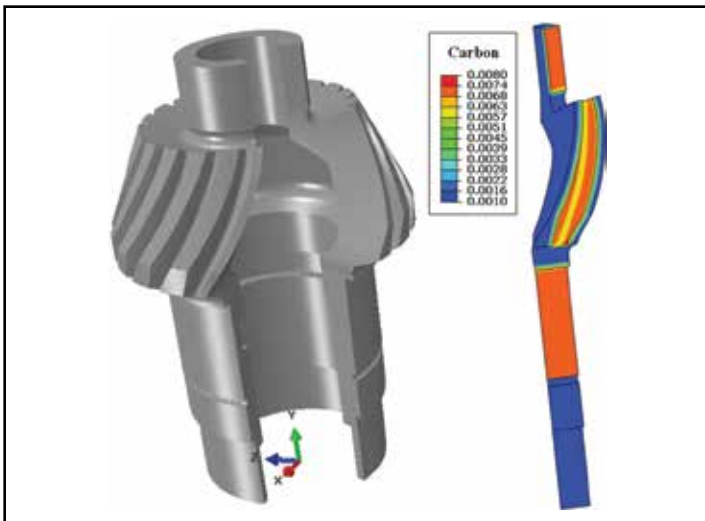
CAD model and FEA model of the spiral bevel pinion gear.
